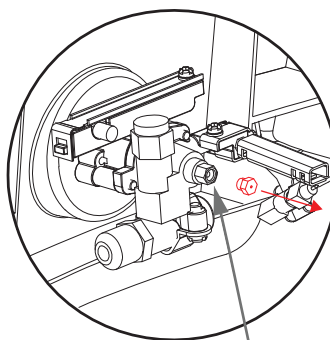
VALVE WITH LPG INJECTOR REMOVED
